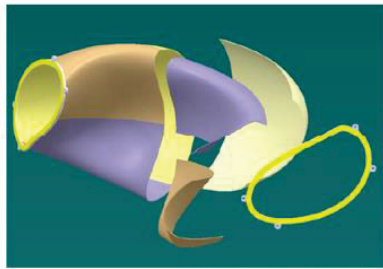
and Fig. 8.2.4 show the procedure to product one section of the vacuum vessel and the pre-assembly process To minimize the work at the site, the manufacturing procedure is made to maximize the completion in the factory by making full use of press, welding, and machining. It is planned that the factory will check the validity of each part by a leak test and only weld between the sections will be done on site.
